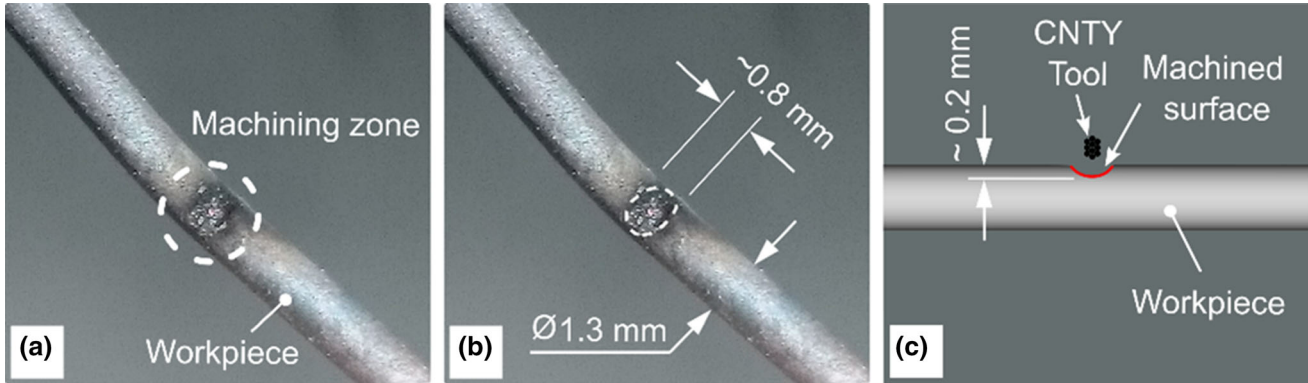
Machined zone on the steel wire (a), the width of the crater (0.8 mm) is larger than the tool's thickness due to spark gap (b), a cross-sectional schematic of the machining zone (c)
